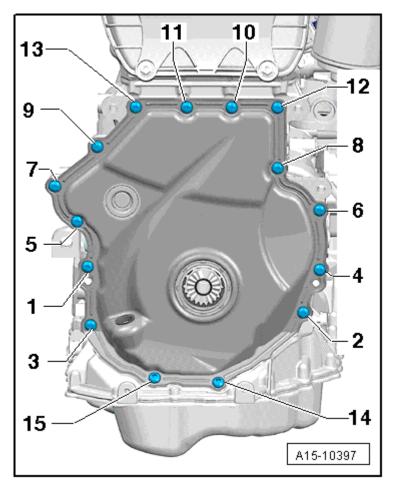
Identifying Timing Chain Lower Cover Tightening Sequence
